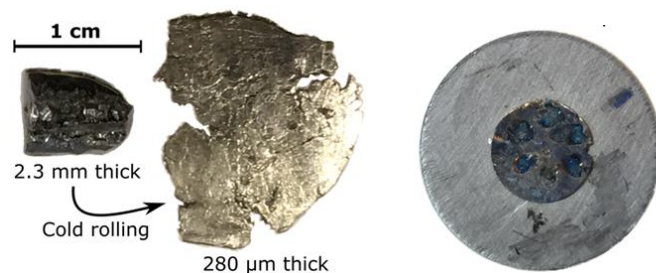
Bottom: Holmium (122.2 mg, 7.9 mm diameter, 280 μm thick, 0.5 ppm Er impurity) spot welded to 19 mm diameter, 500 μm thick Ta. Top: 9.1 x 7.3 x 2.3 mm thick Ho piece before and after cold rolling to 16.5 x 19.7 x 0.28 mm thick foil with visible cracking around edges.
